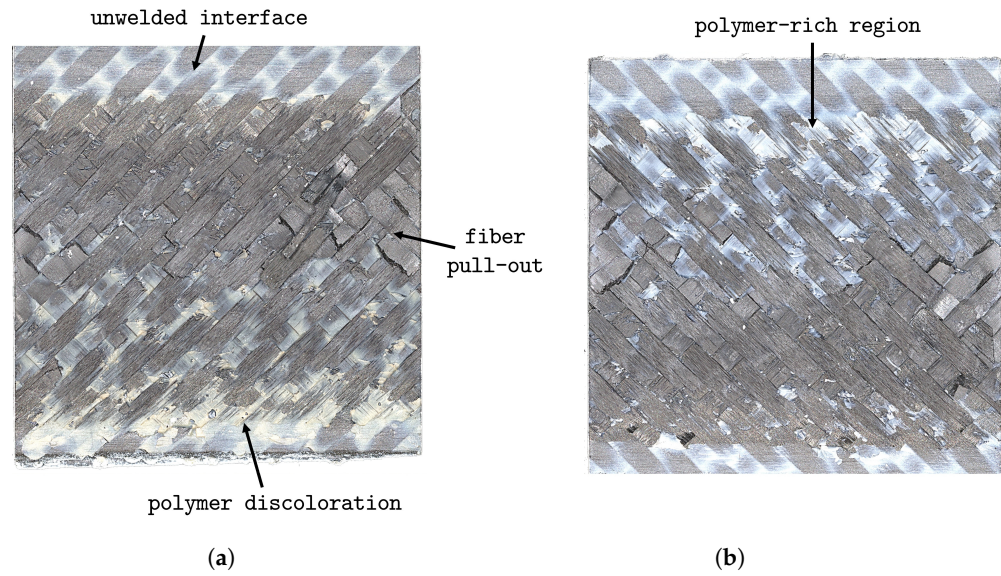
Fracture surfaces of specimen A2 on the (a) top and (b) bottom adherend.
